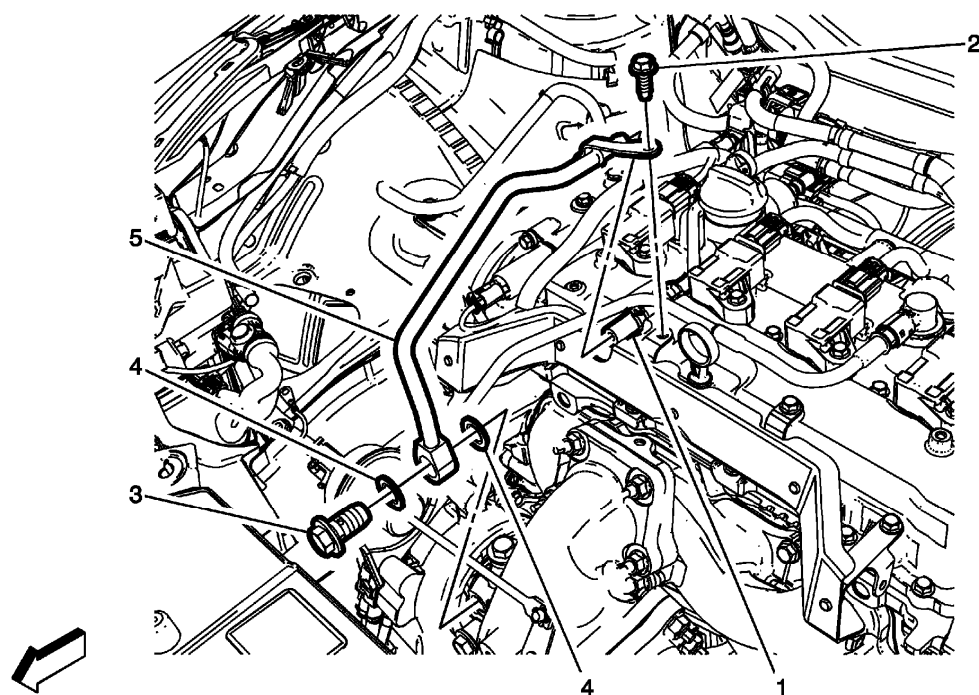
Turbocharger Coolant Return Pipe (LTG)
